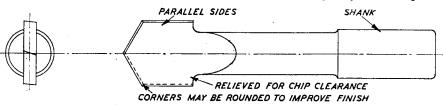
Form of flat drill recommended for opening out and sizing holes.
